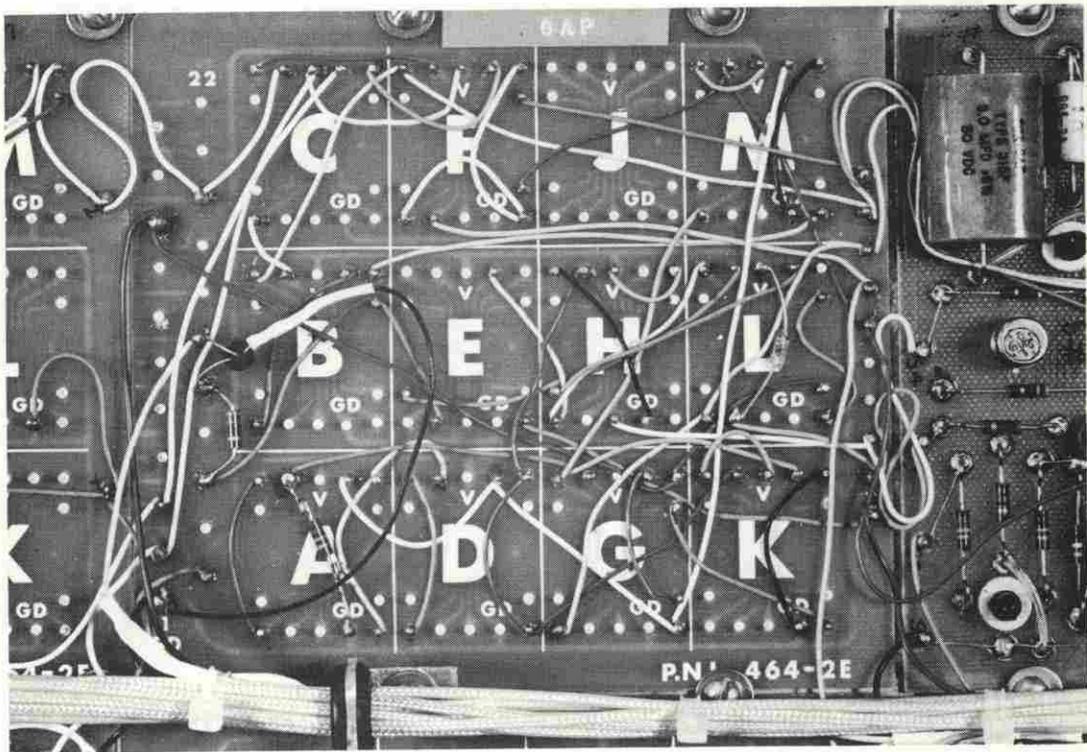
(b): Integrated Circuit Construction. "Flat Packs" are welded on the opposite side of the board.
